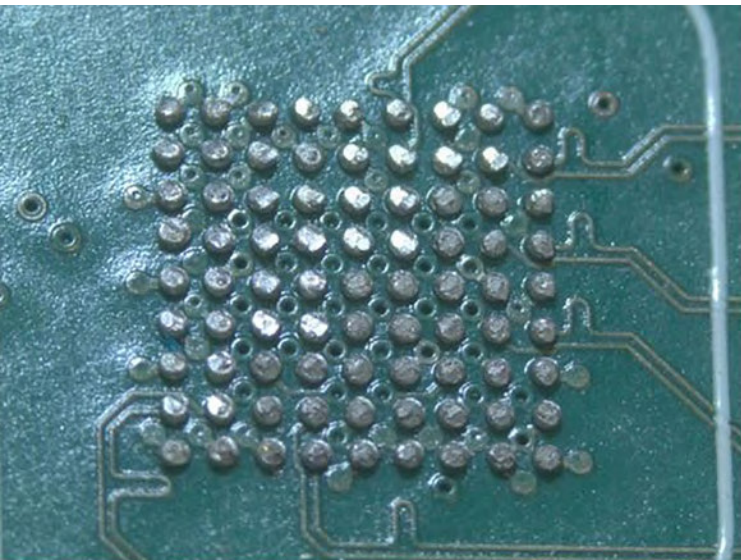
The solder paste melted and formed the joint with the balls of the socket.
